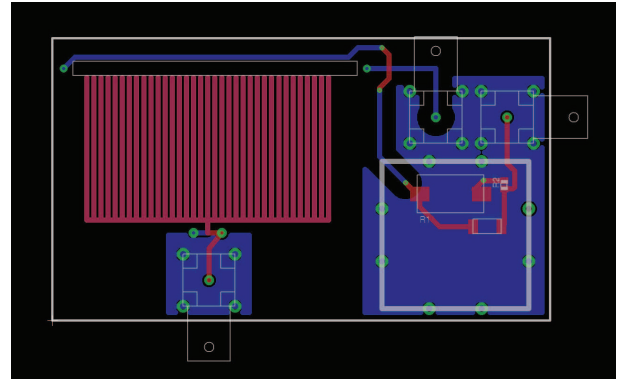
Printed circuit board with receiver and transmit capacitor. The top side is shown in red, and the bottom side is shown in blue
